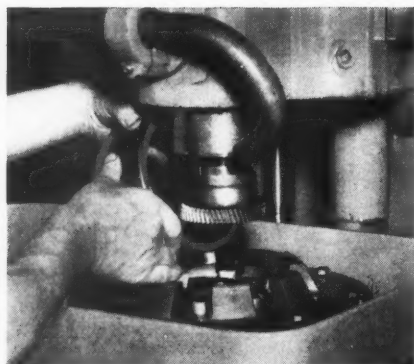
Operator Removing finished Gear from Diaphragm Type Chuck. Note Cutter-spindle is at top of stroke to facilitate removal.
